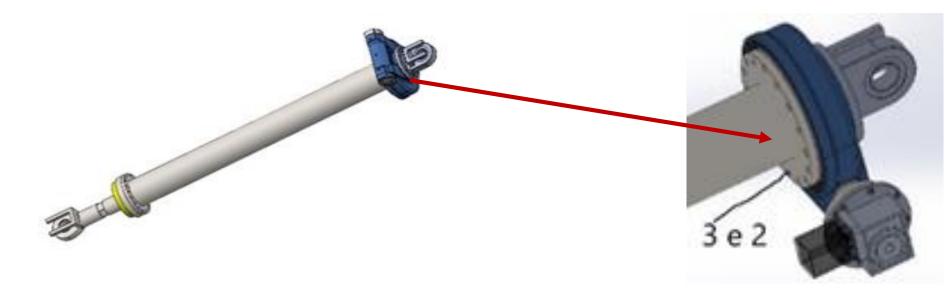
One arm of the CAS (movable hexapod) with detail of the indexation mechanism, gearbox and stepper motor.
